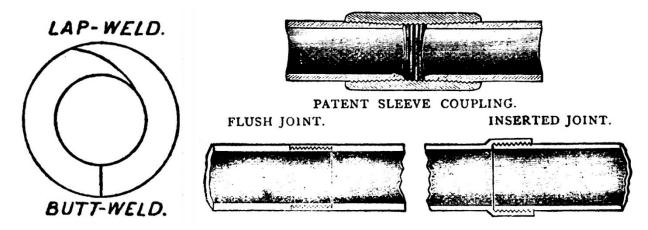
Drawing comparing lap-welds and butt-welds (left) and various forms of couple joints (right).
